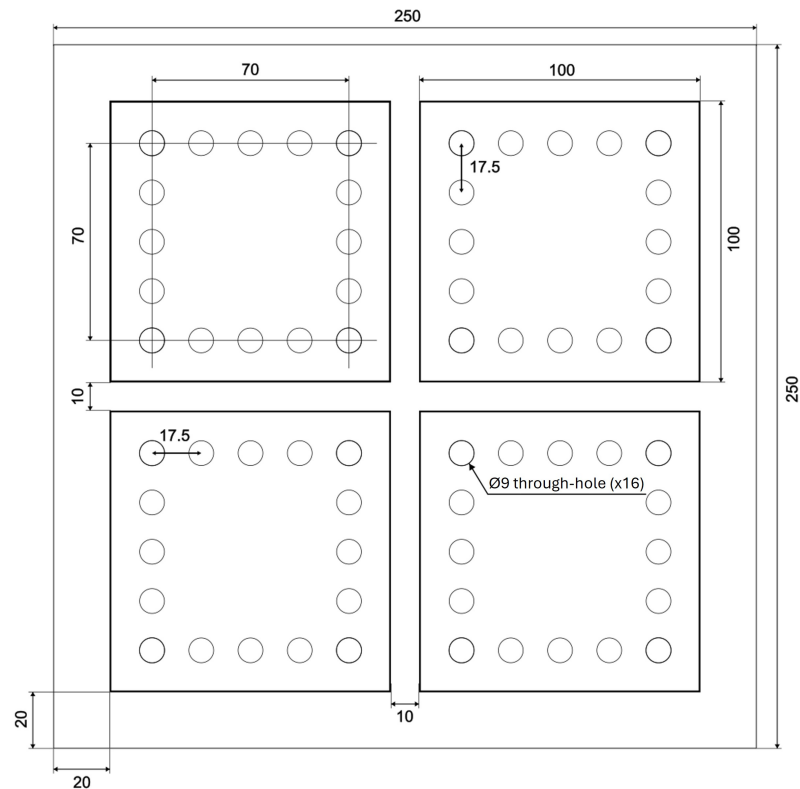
Specimen design and dimensions for penetration tests on hybrid CF-CNTF composites.
